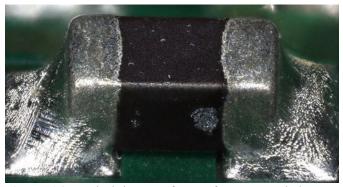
Optical image of a surface mount inductor showing corrosion mid -body through the epoxy coating.
